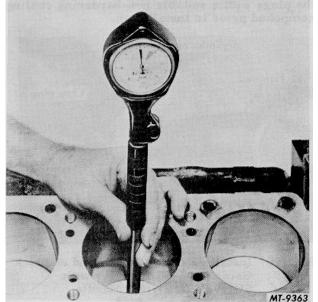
Checking Cylinder Bore Using Dial Bore Gauge SE-2331
